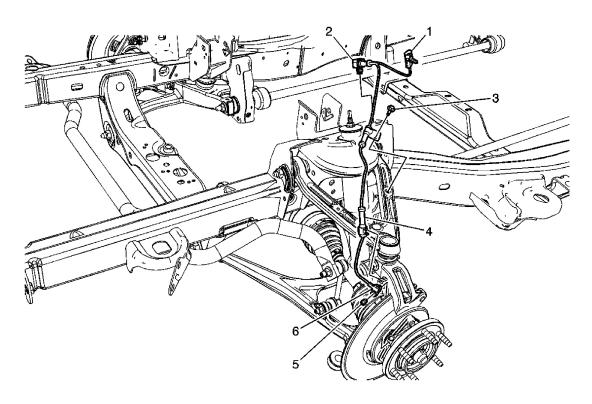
Replacing Front Wheel Speed Sensor Courtesy of GENERAL MOTORS CORP.
